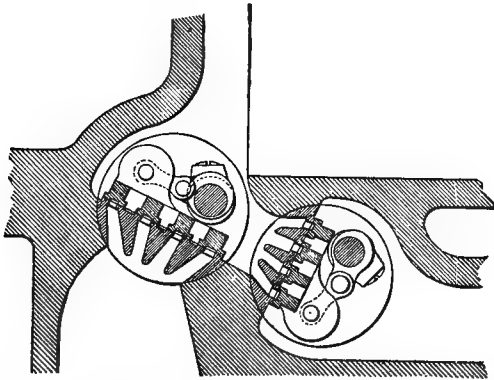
Section of end of cylinder, showing Wheelock's new system of valves.
